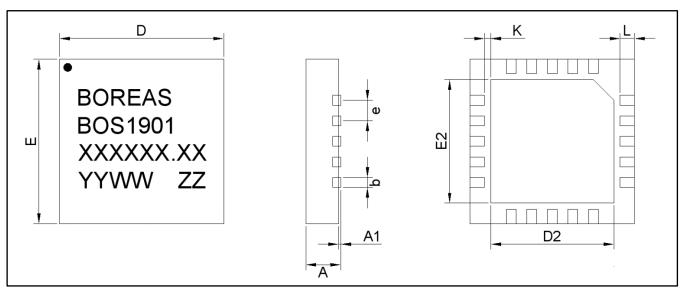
QFN 20L 4.0mm × 4.0mm package outline drawing
